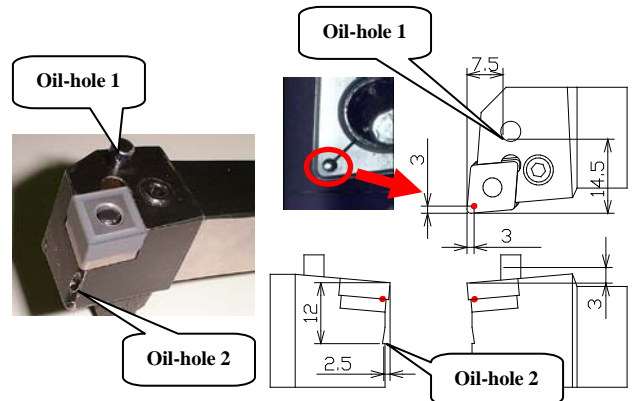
Overview of the cutting tool with ϕ 1mm oil holes and the position of temperature measurement near the cutting edge
